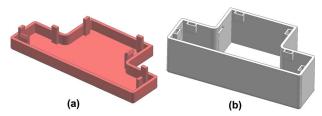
CAD drawing for the optimized DVD player model (solution 1): (a) top part and (b) base part
